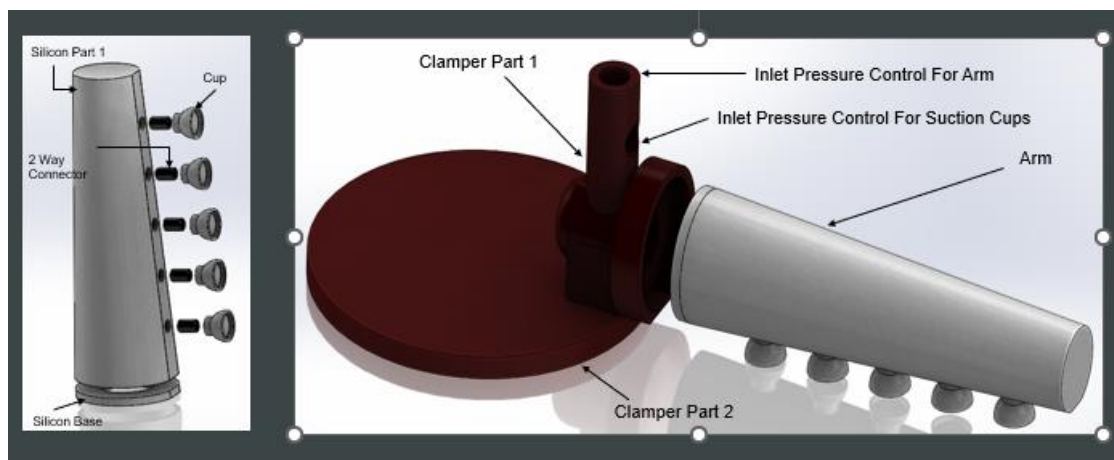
3D CAD of gripper with clamper plate (SolidWorks).
